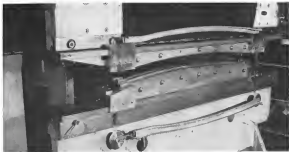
Completed farmer hat at top and bottom of machine after completion by single thrust impact process.
